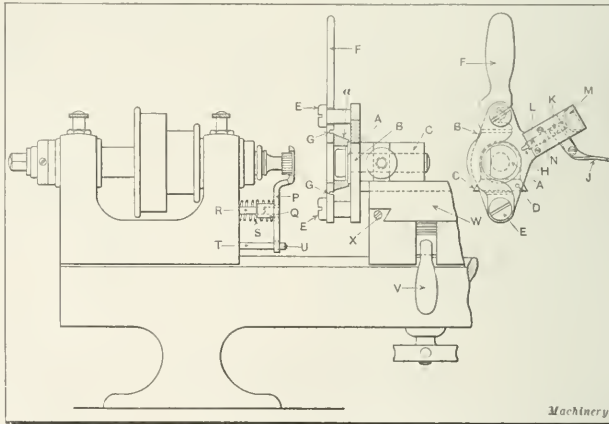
Bench Lathe with Boring Cross-slide equipped for under-cutting Fuse Parts
